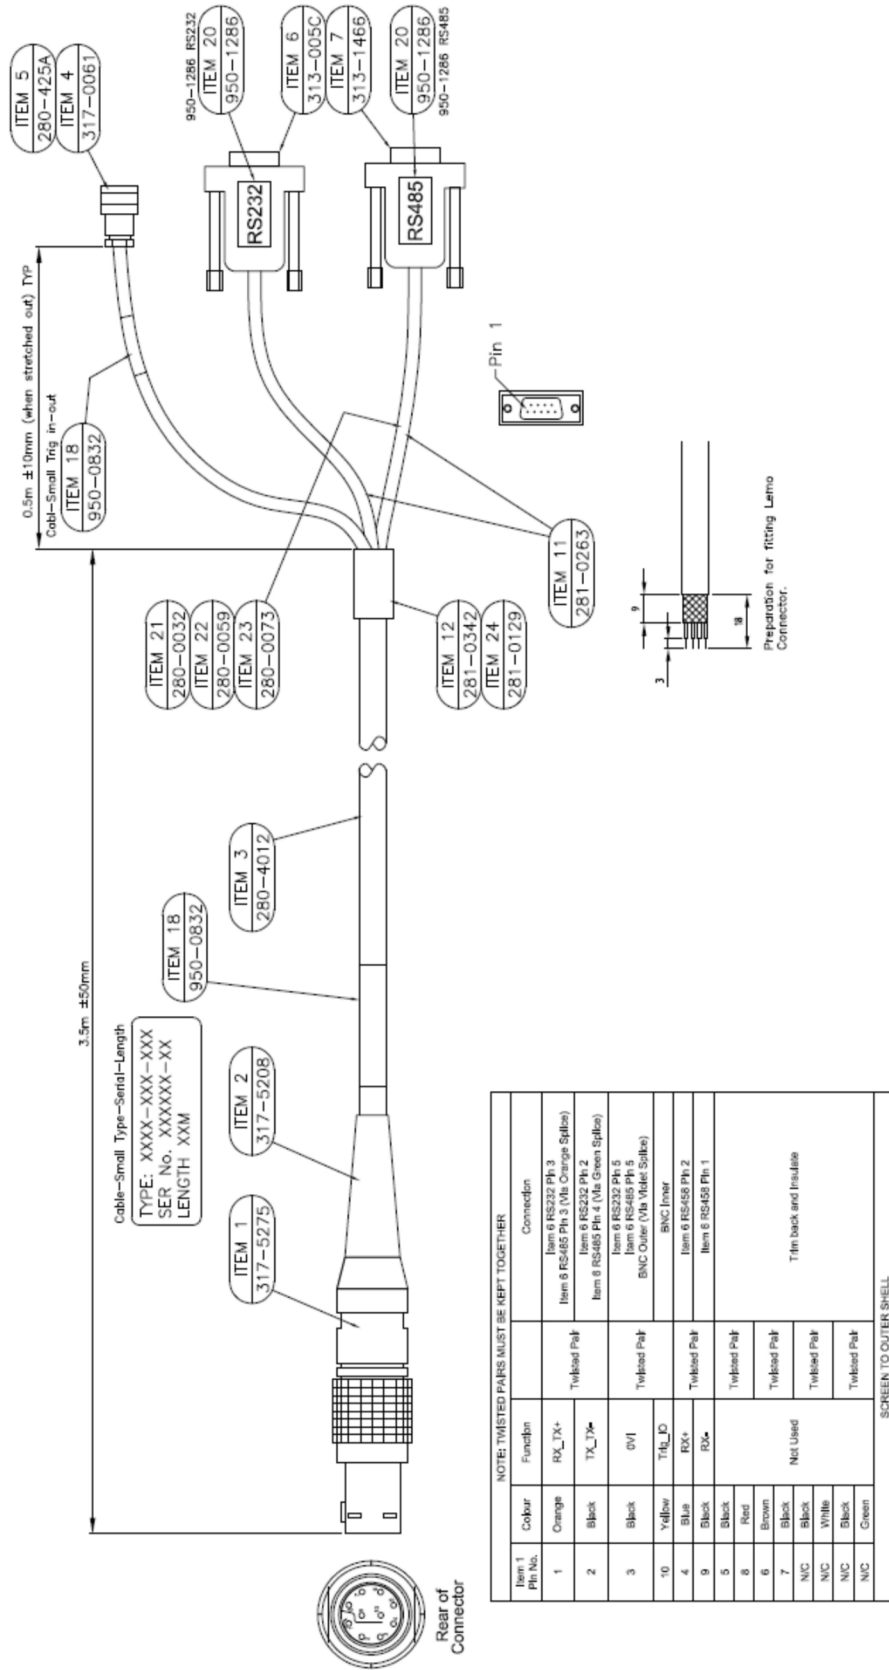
Auxiliary Lemo Cable Assembly – CPN 820-6817
